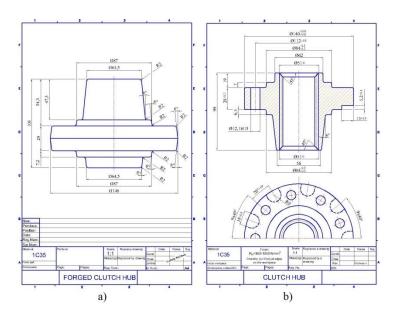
a) Forged clutch hub; b) Machined clutch hub [9]
